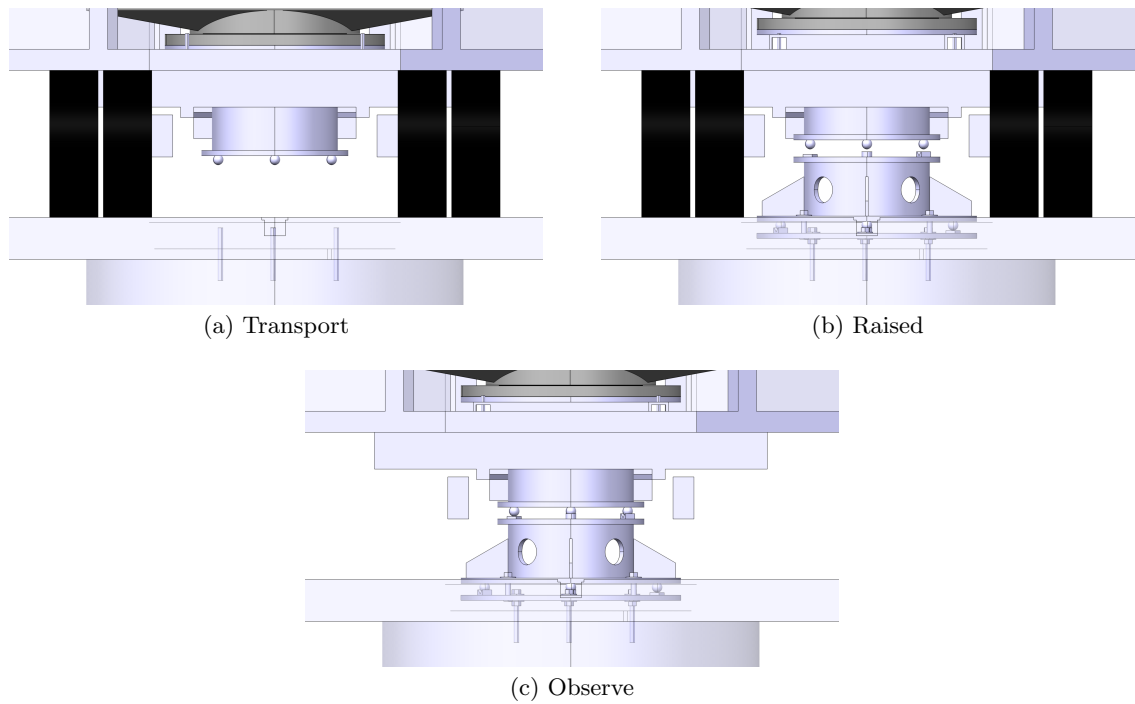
A section view showing (from bottom to top) the concrete pad, the adapter plate that connects the lower steel pier via kinematic mounts, the mating of the lower pier to the upper pier also via kinematic mounts, and the telescope and trailer above. (a) The telescope in the transport position with the lift plate and the trailer frame locked in contact; in this configuration the trailer can be moved across the observatory grounds. (b) The telescope in the raised position with 3 inches between the lift plate and the trailer frame and moved over the lower pier. (c) The telescope in the observe position, connected to the lower pier.
